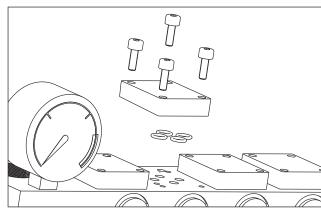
Control Valve Mounting Station and Cover Plate (D03 Manifold Shown)
